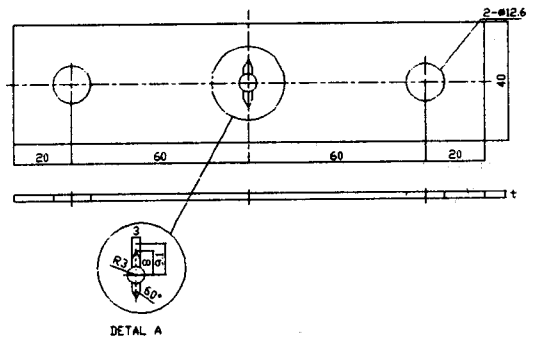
Geometry and sizes of center cracked tension specimen for fatigue crack growth rates test
